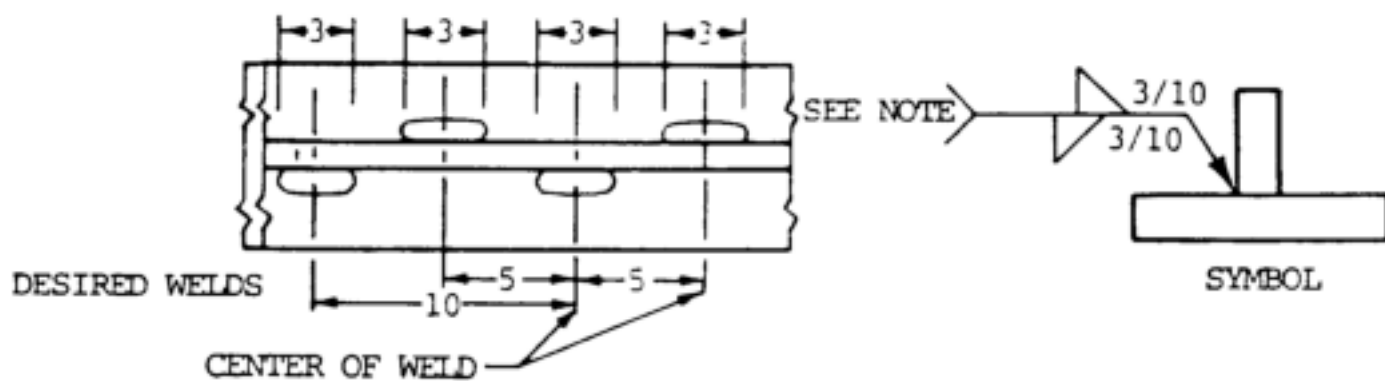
Dimensions of staggered intermittent fillet welds.
